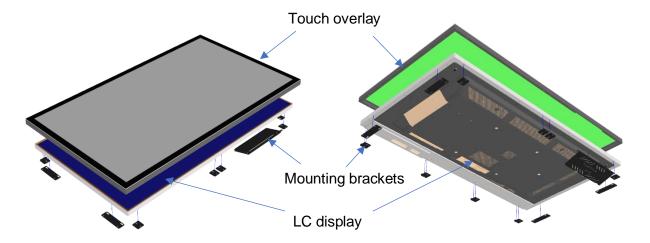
Exemplary exploded view of fluxTOUCH gen3 touch overlay and LC display
